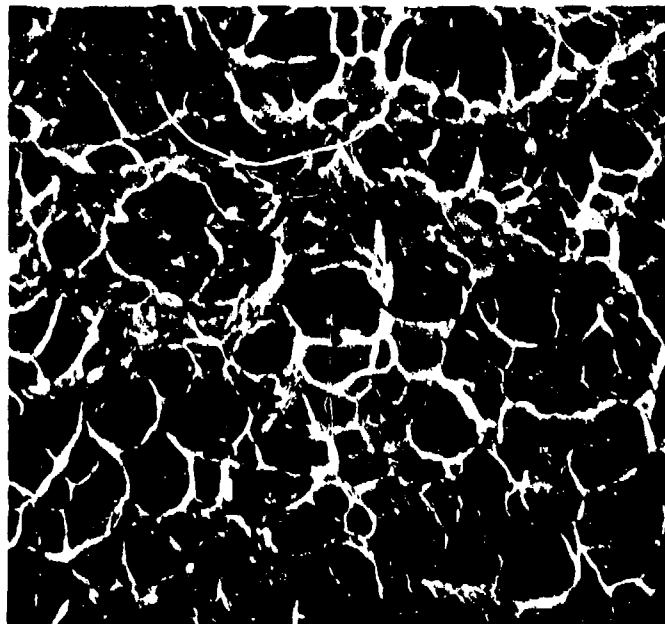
Fracture surface away from the porosity defects, 3500x.
